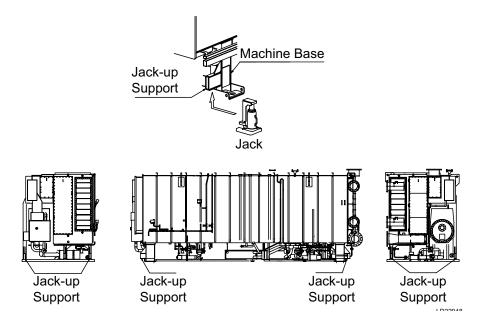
MOVING THE MACHINE ON TIR ROLLERS
